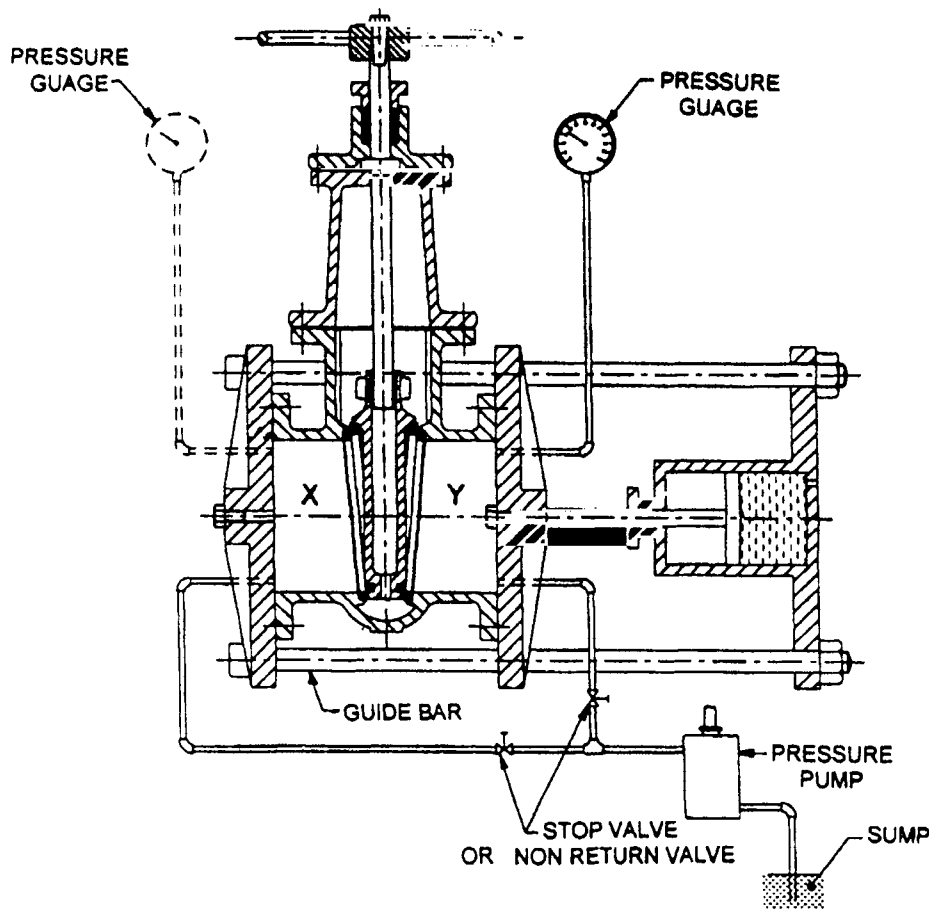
TYPICAL VALVE TESTING ARRANGEMENT FOR CLOSED-END TEST
